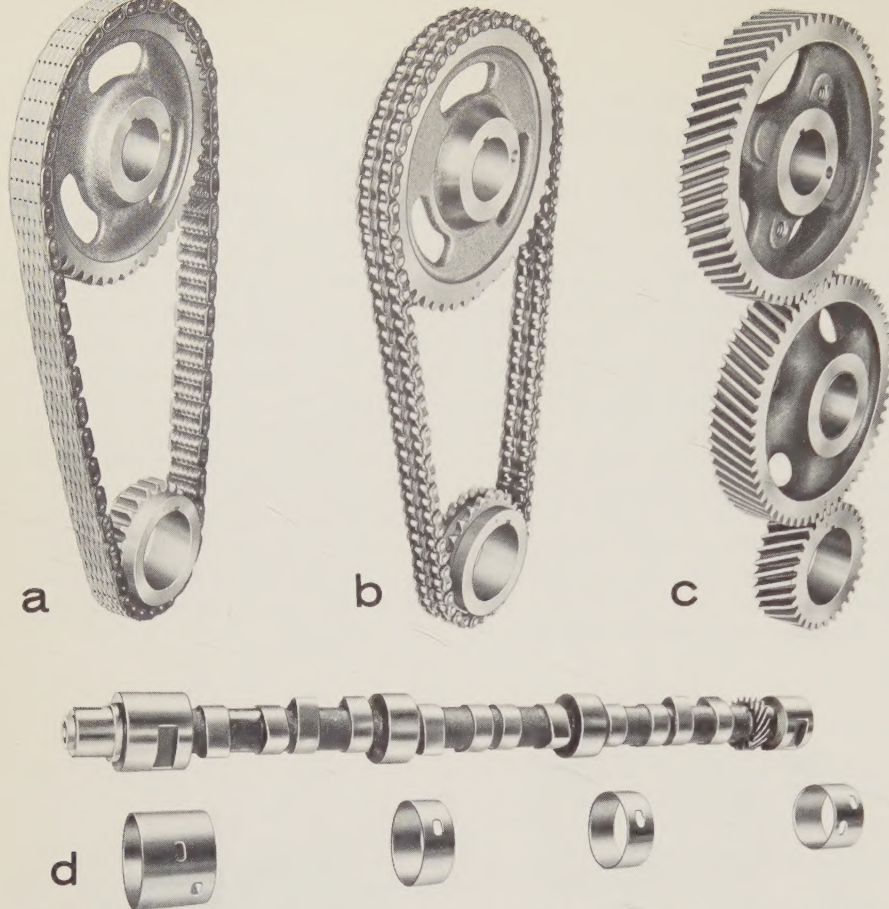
Three different drive arrangements are used to drive the camshaft: a silent chain with matching sprockets (a) for the 305 engine in light duty trucks, a roller chain (b) for the 305 and 351 engines in medium duty trucks, and a three gear drive unit (c) for the 401 and 702 engines used in heavy duty trucks. The three V-6 engines use identical camshafts (d) which are supported by four equally spaced journals. The camshaft in the V-12 engine uses seven journals.
